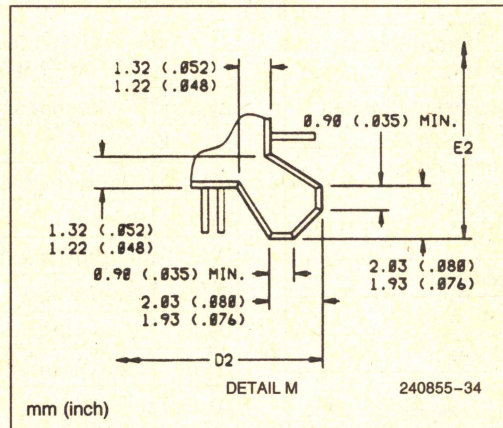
132-Lead PQFP Mechanical Package Detail—Protective Bumper
